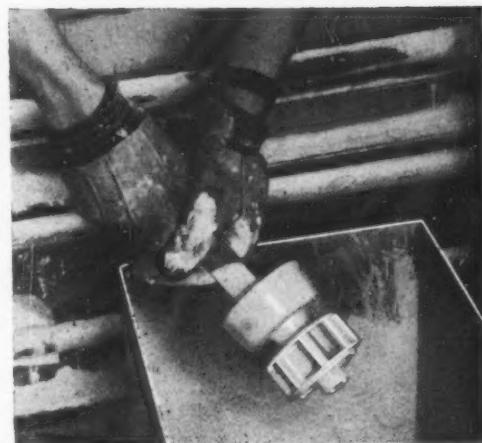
The mercury pattern produced in the mould shown in Fig. 2 is here seen partly invested
